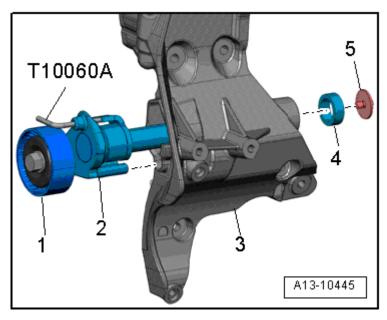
Identifying Ribbed Belt Tensioner Bolt And Locating Electrical Wiring Harness Courtesy of AUDI OF AMERICA, LLC
